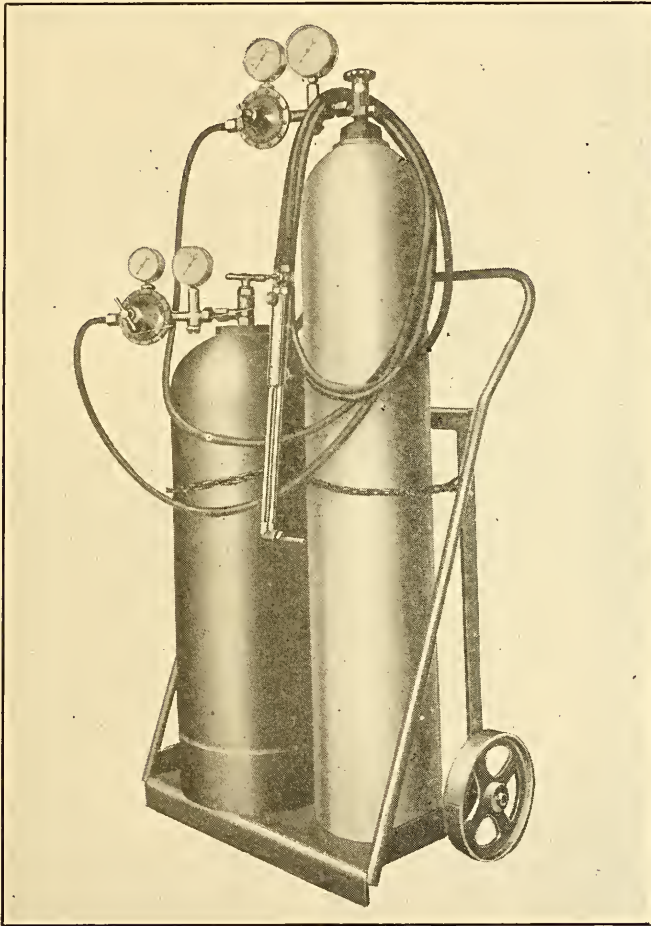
All-Steel Hand Truck for Holding Gas Cylinders and Welding Outfit.
